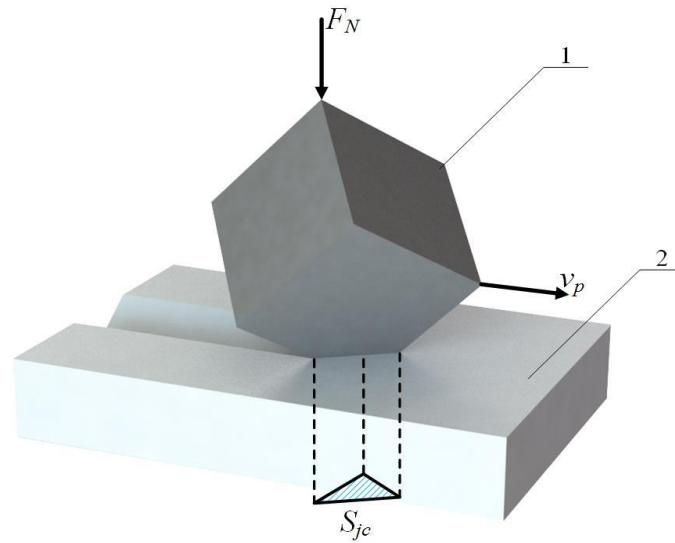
Material removal model of single particle: 1, particle; 2, machined surface.
